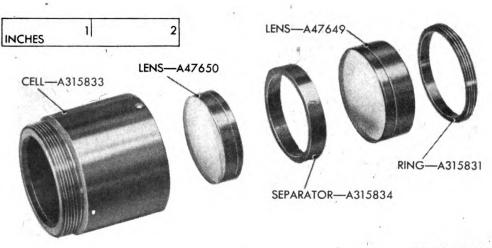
Lens Cell Retaining Ring and Ball Retaining Ring — Exploded From Eyepiece Assembly
